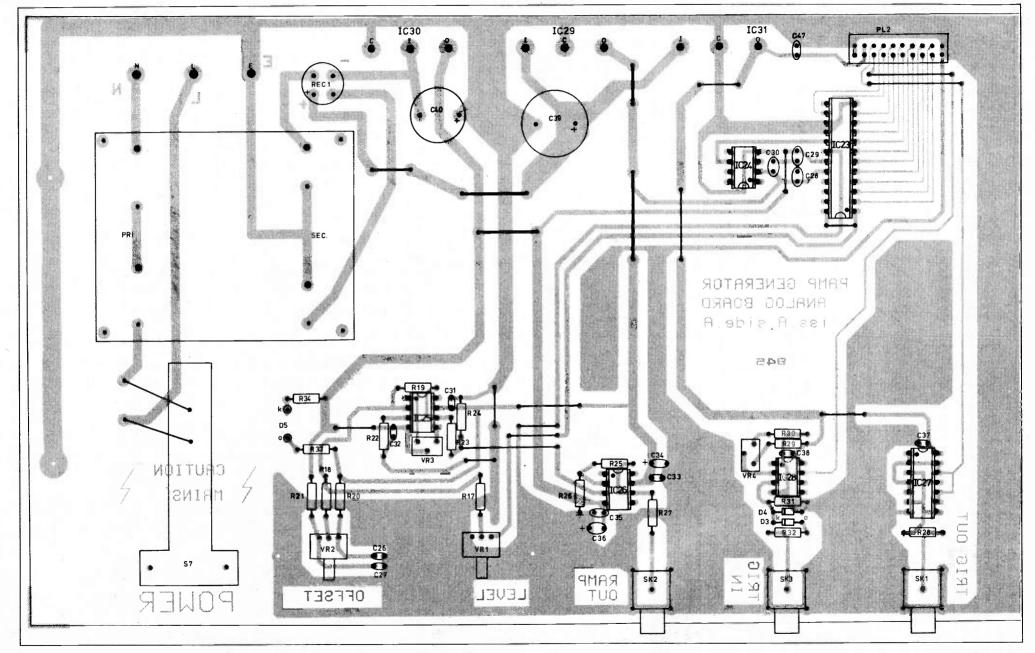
Component layout details for the Analogue board of the Ramp Generator. This board is single-sided. The horizontal extremes of the board are not shown – they are vacant of components but include the mounting holes.
